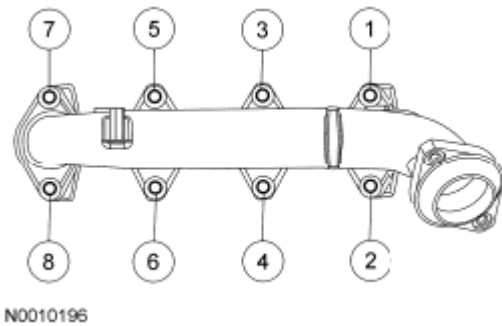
Identifying LH Exhaust Manifold Nuts Tightening Sequence
